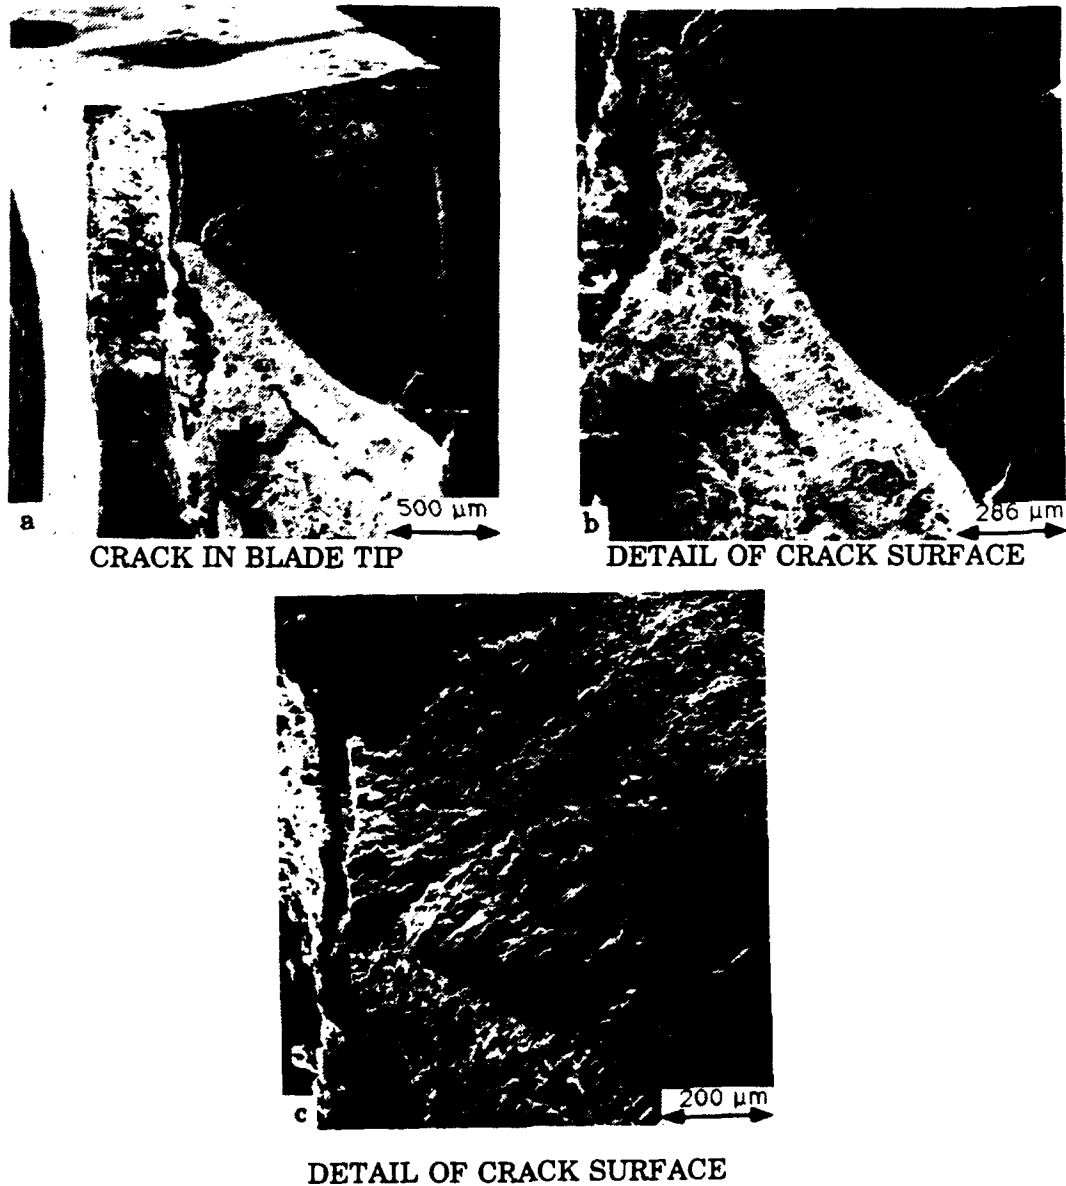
Fractographs of tip cracks formed during the ASMET engine test of a repaired blade with the original tip cooling scheme before test.
